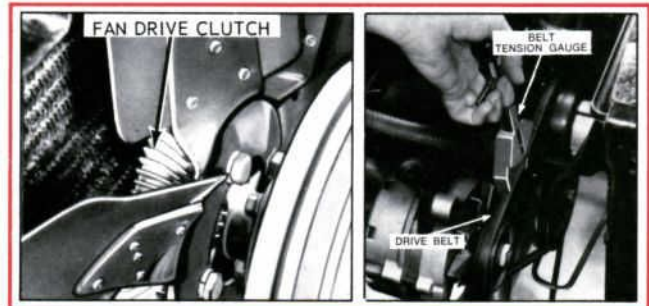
Typical Installation of the Fan Drive Clutch Assembly on Ford-Built Passenger Cars.
